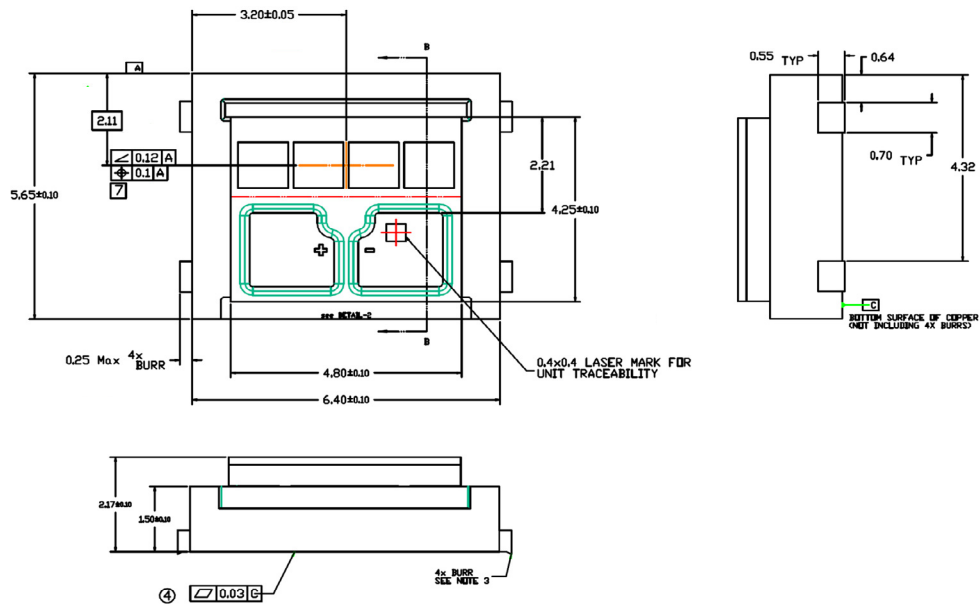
Mechanical dimensions for 1x4 LUXEON Altilon Core.
